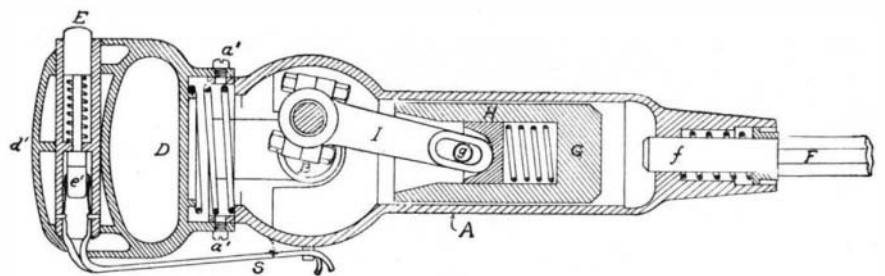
LONGITUDINAL SECTION THROUGH HAMMER.
